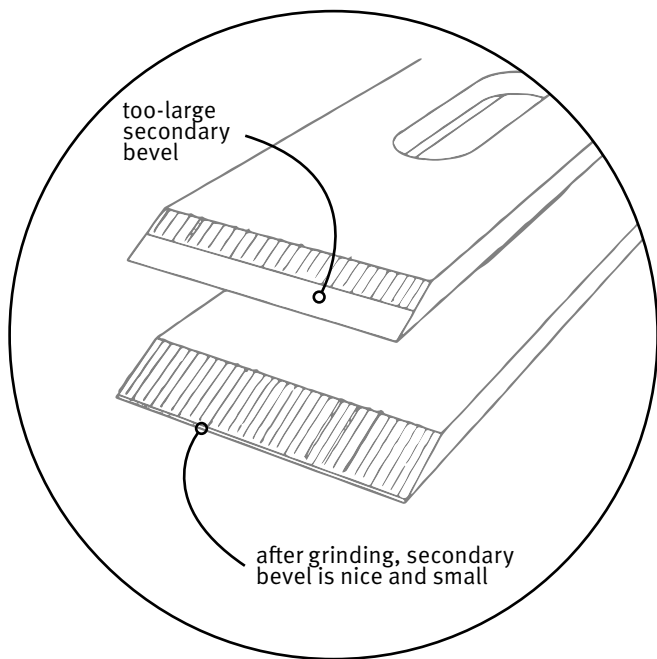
Before grinding, the secondary bevel has become far too large. Grinding reduces the size of the secondary bevel, making future sharpenings easier.
